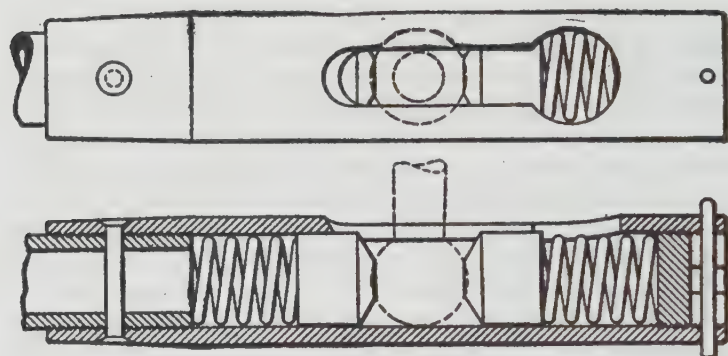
BALL AND SOCKET SPRING CUSHIONED CONNECTOR.
